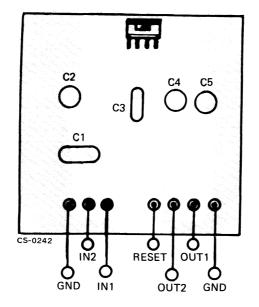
P.C. board component layout of fig. 2 (1: 1 scale)
